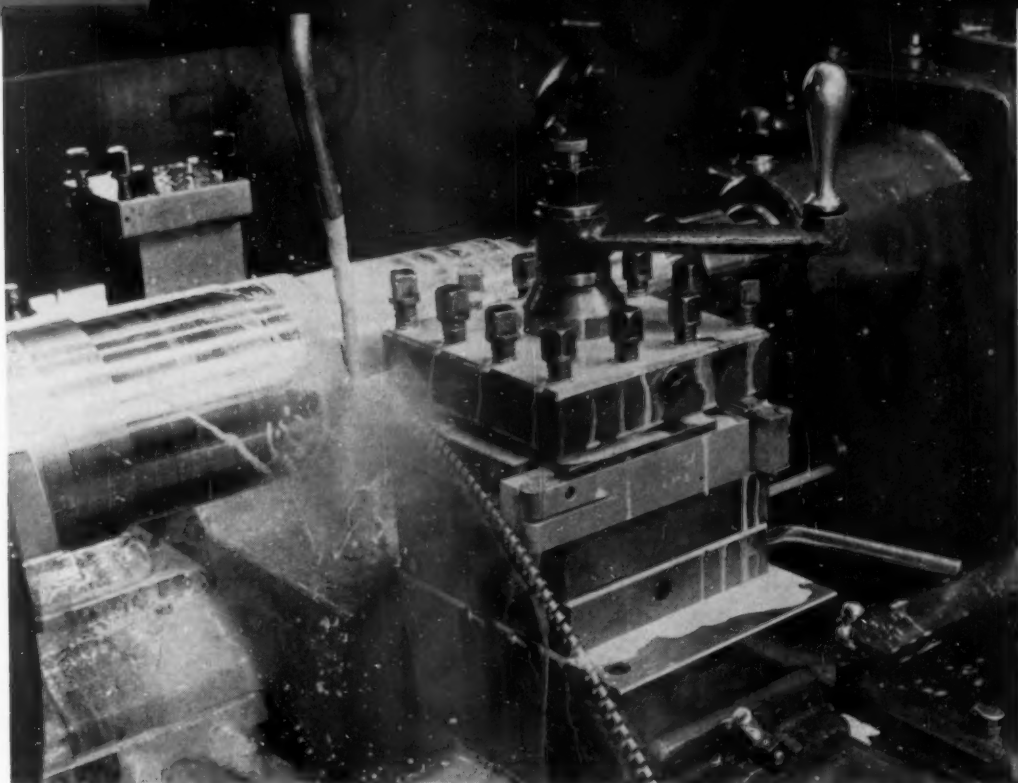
Ceramic cutting tool machining AISI 1040 steel at 450 sfpm, feed of 0.014 ipr and depth of cut of 0.150 inch. Until recently ceramic tools were not thought suitable for use with cutting fluids. A duplicate tool is on the back of the toolholder.
